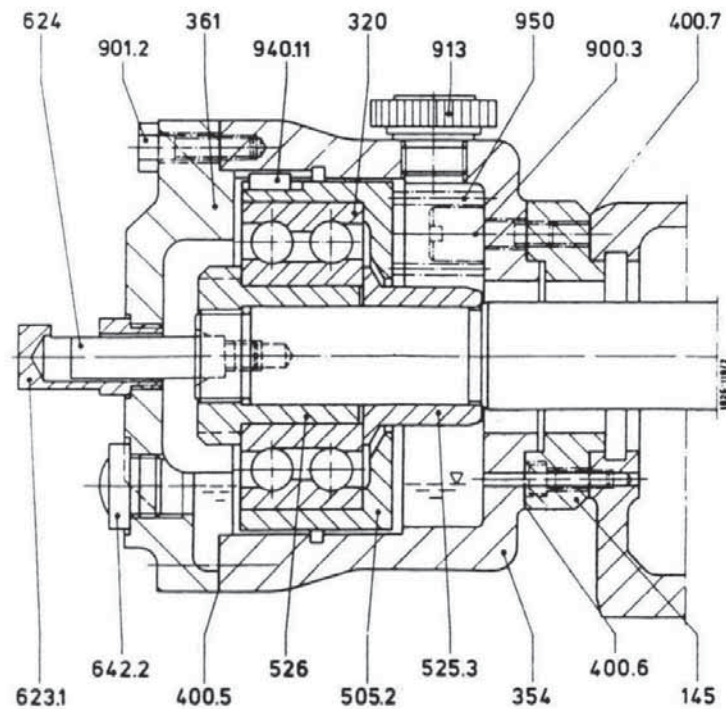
Lift-off device with roller bearings for pumps with plain bearings for sizes 40 to 100
